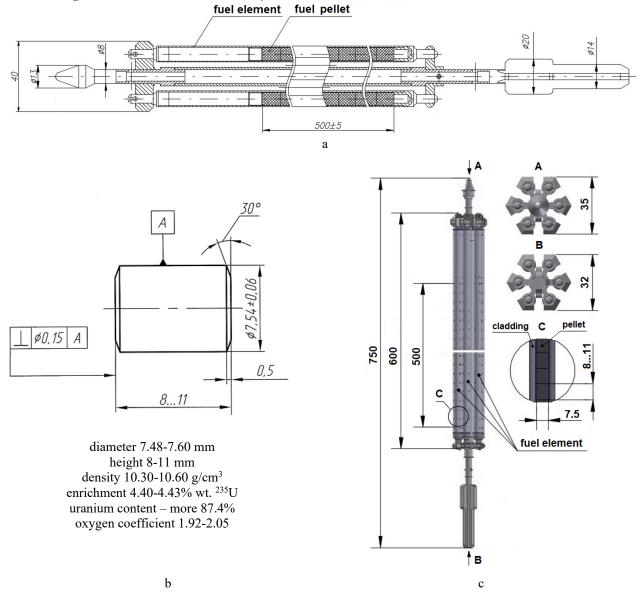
Fuel assembly (FA-X) (a - common view, c - 3D-model); UO₂ pellet and main requirements (b)
